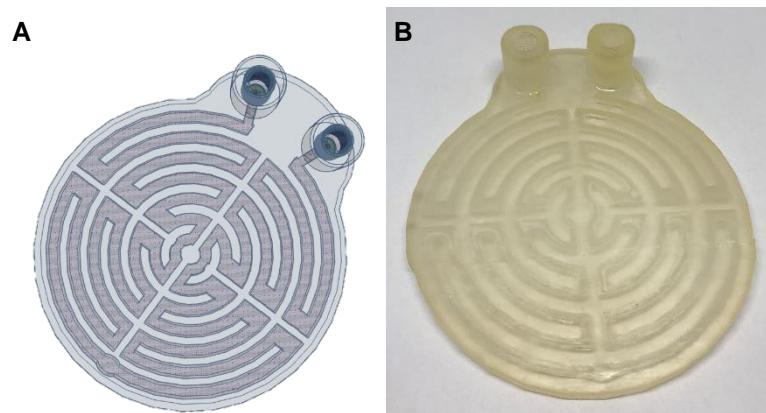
A) CAD drawing of circular hotplate reactor design 12; B) Printed circular hotplate reactor design 12.
